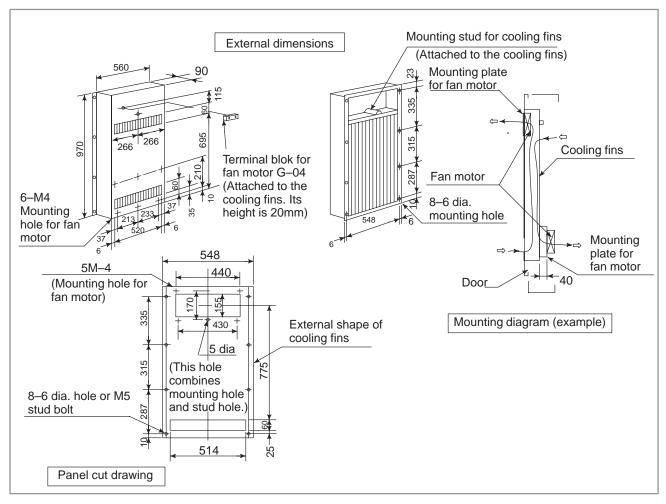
(d) External dimension and mounting method of cooling fin C (A02B-0053-K305)
